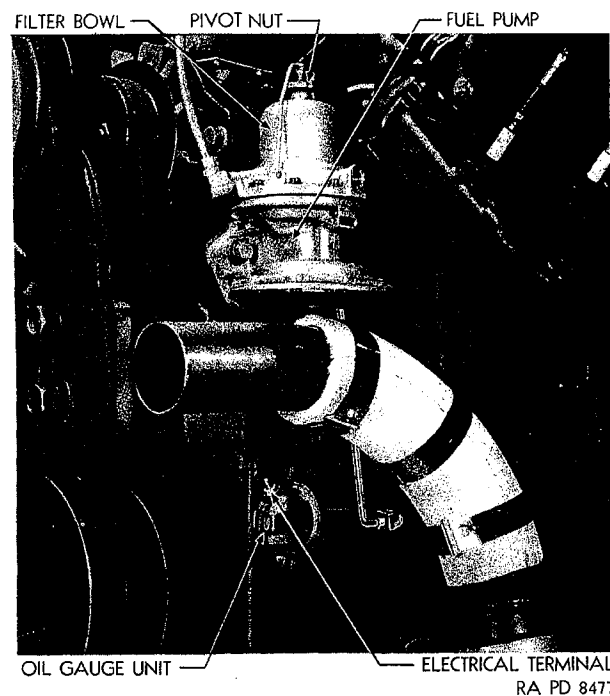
Fuel Pump & Oil Pressure Unit Mounting
